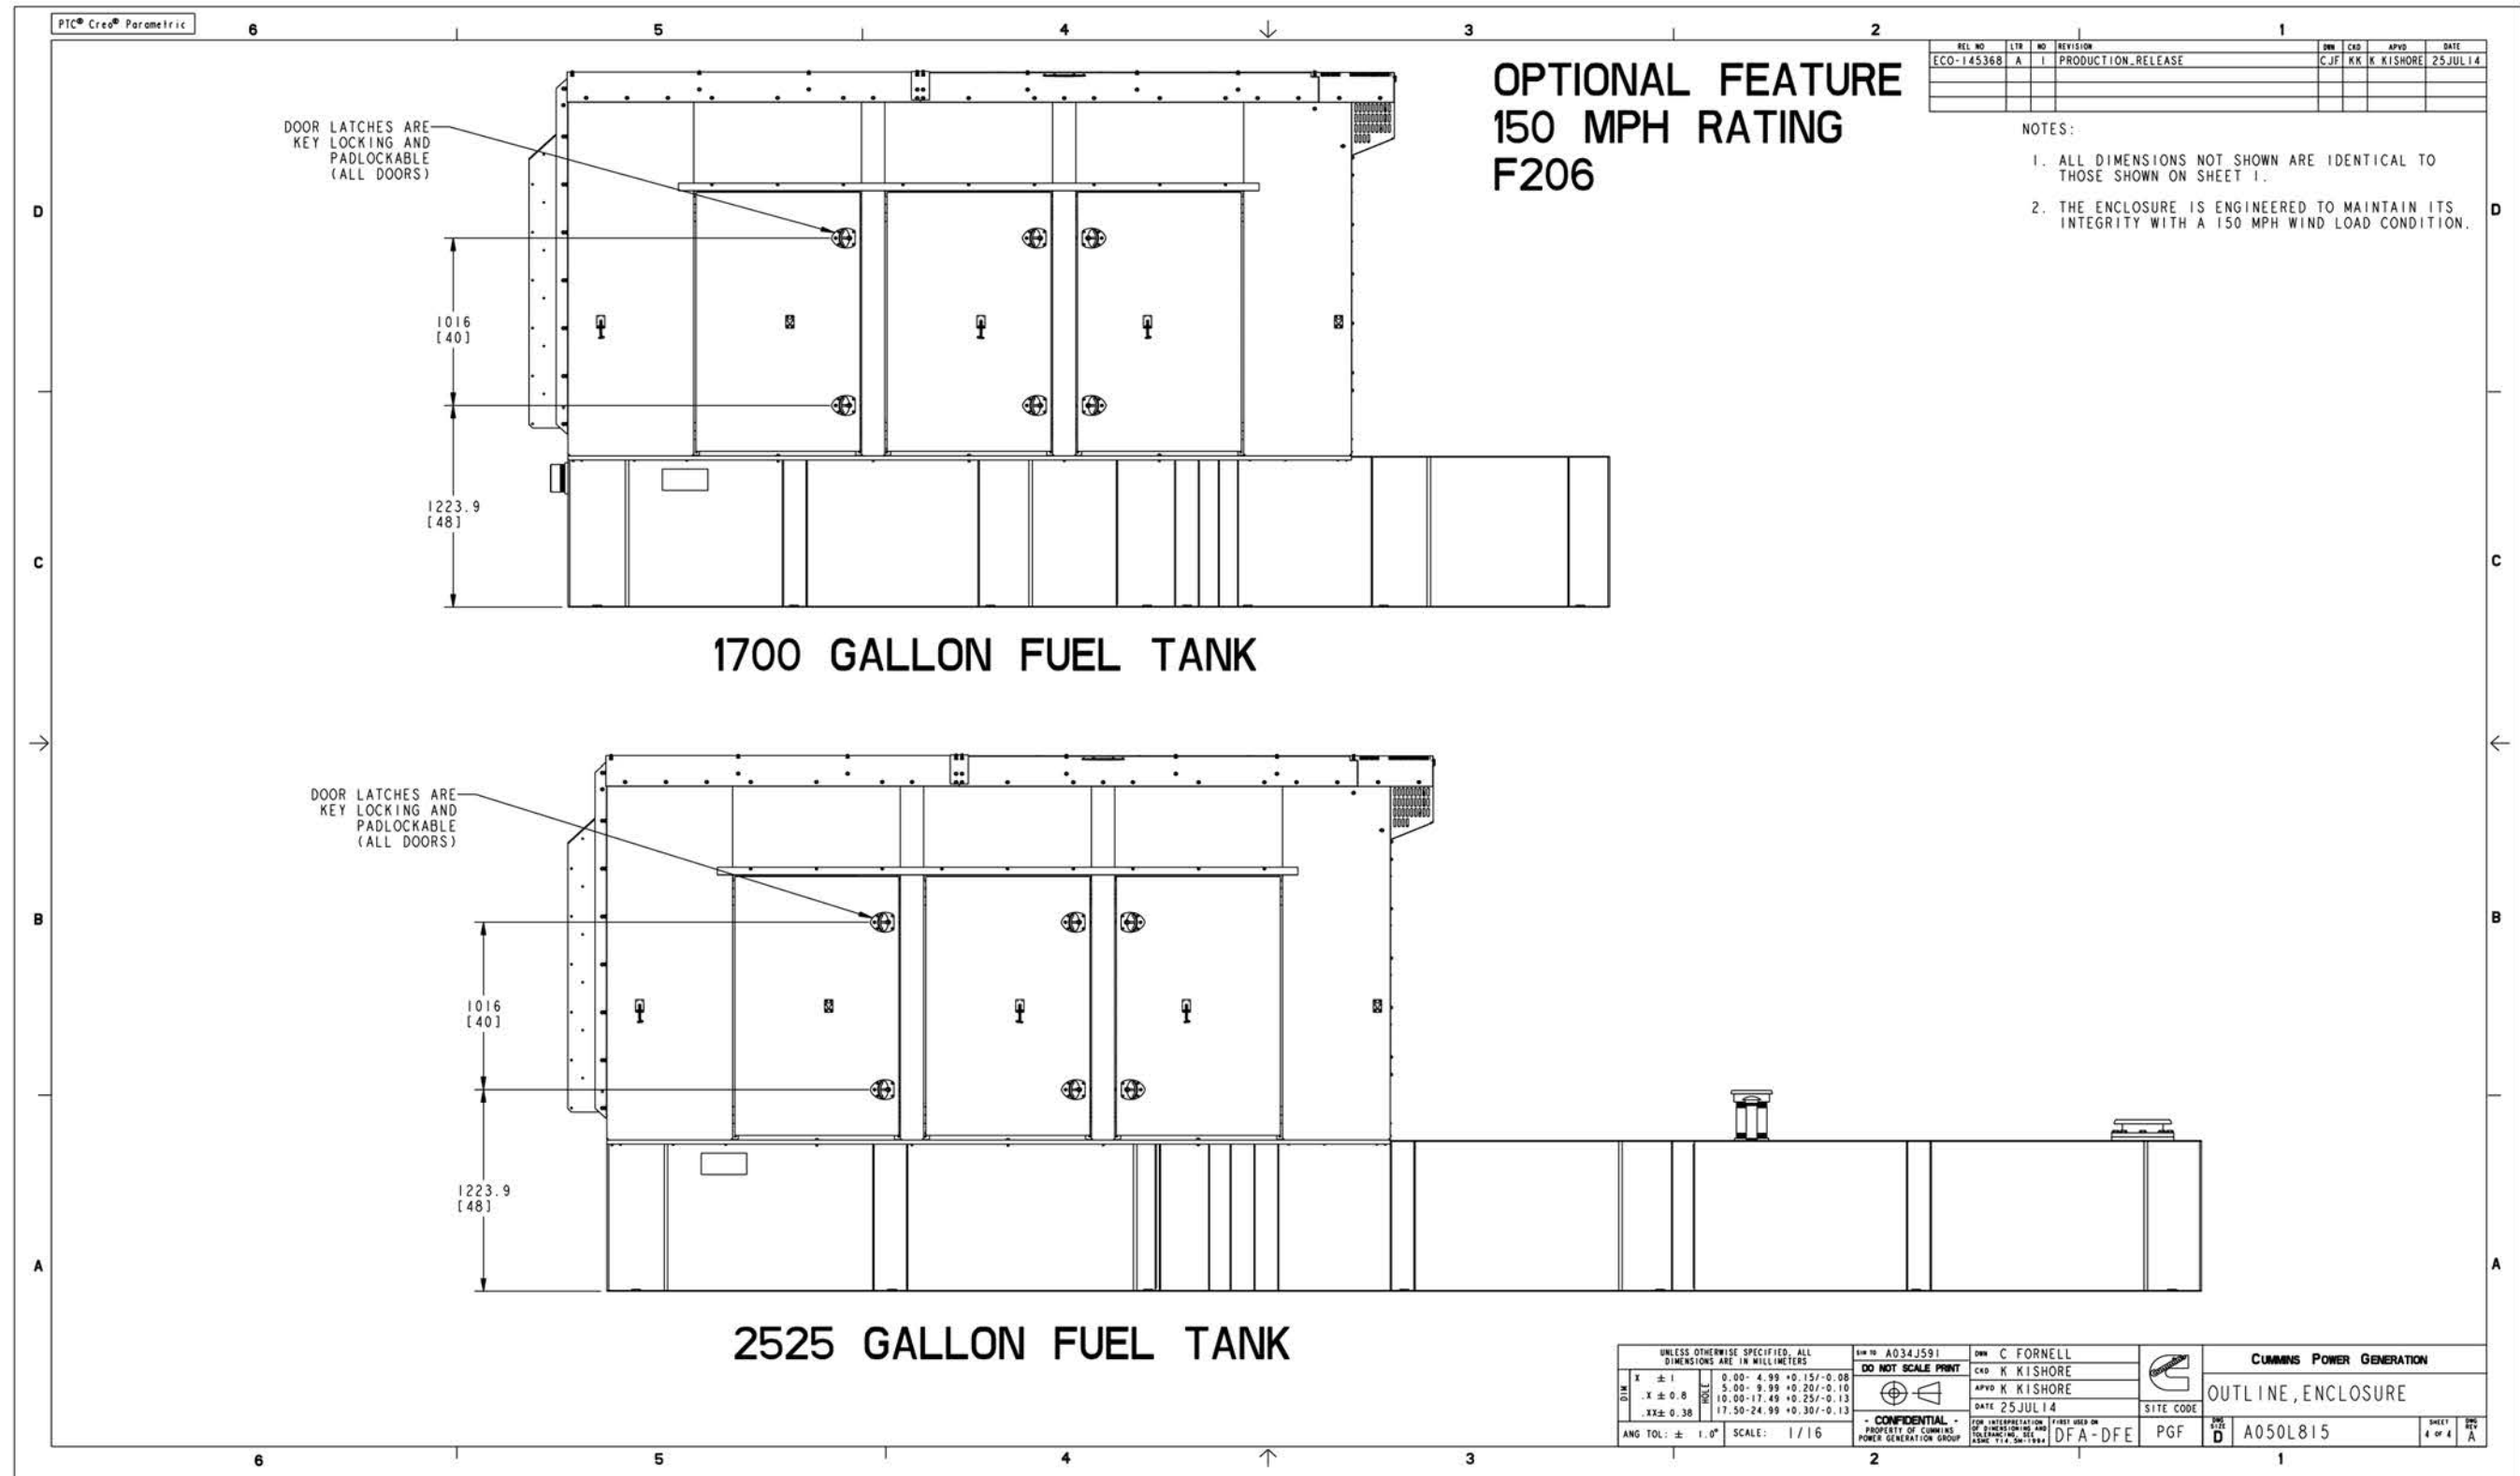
ENCLOSURE OUTLINE DRAWING F200, F201, F203, F204, F206 SHEET 4 OF 4
